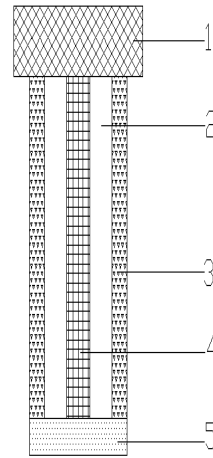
The vacuum heating tube: 1 – insulating separator; 2 – vacuum insulating separator; 3 – electric heating element; 4 – loop; 5 – contractor.
